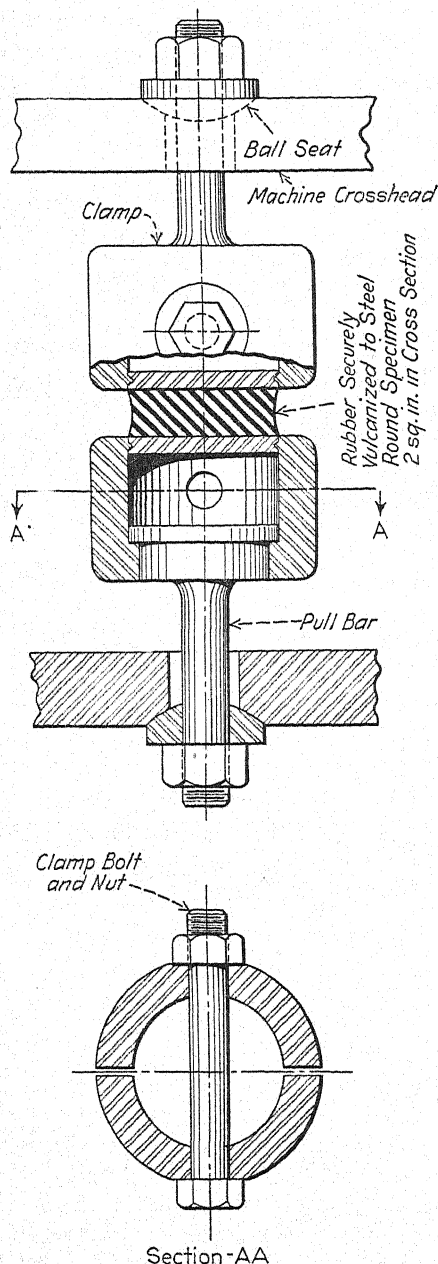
Method of Testing Adhesion When Sample Section Is Taken from Production Parts.
